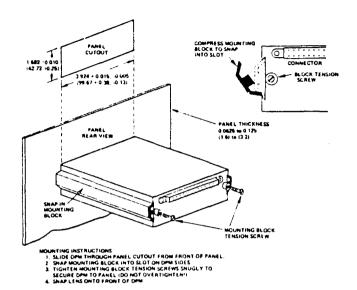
AD2009 Mounting Instructions (Dimensions shown in inches and (mm))
